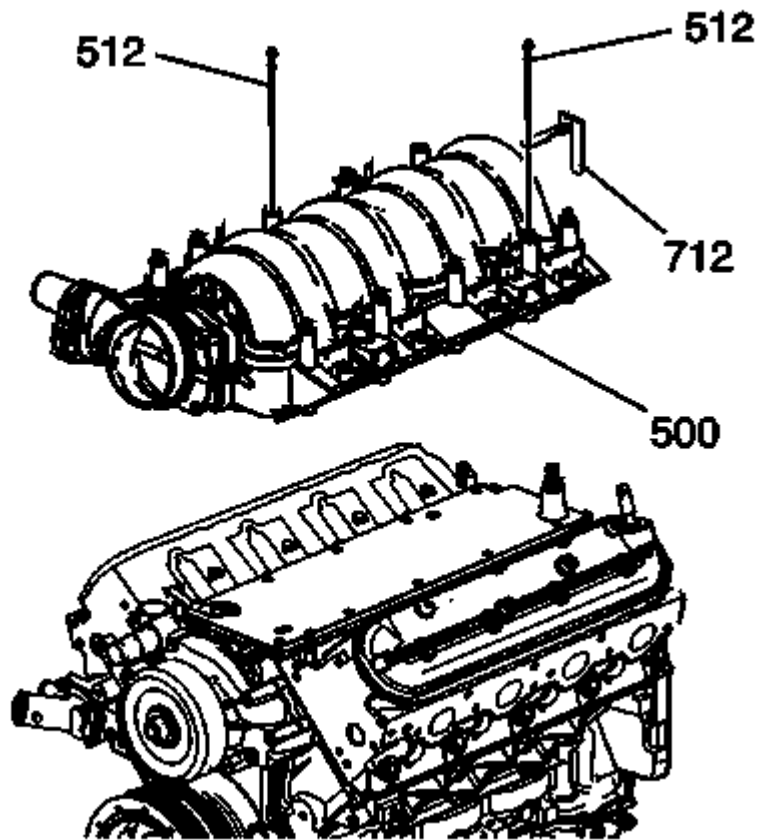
Intake Manifold, Bolts & Fuel Rail Stop Bracket
